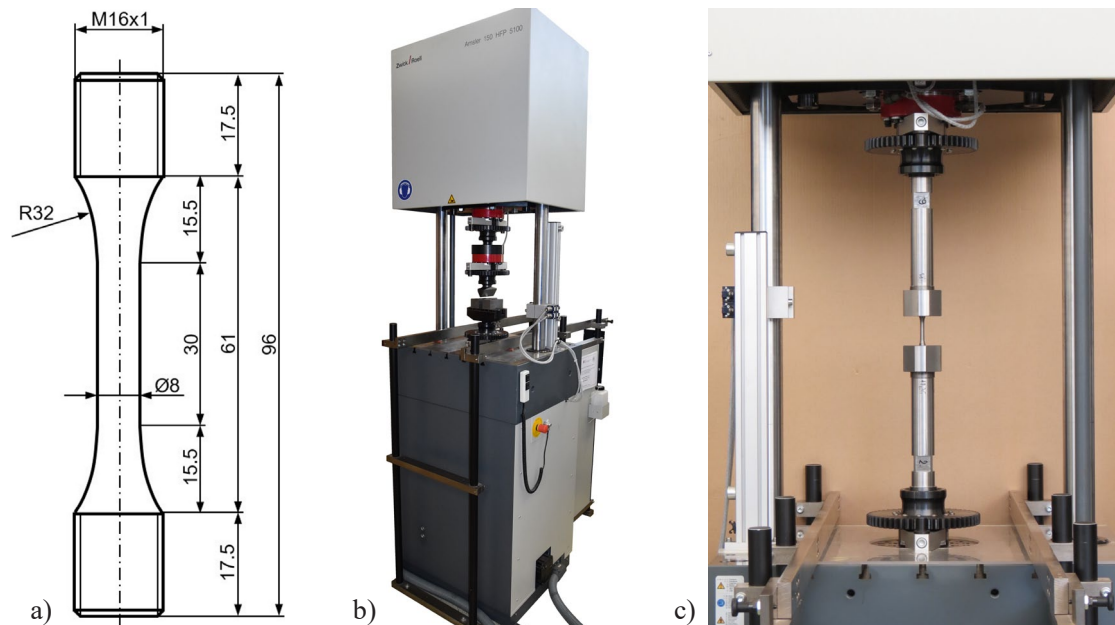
Test specimen and experimental machine used for fatigue tests; a) shape and dimensions of the test specimen; b) fatigue testing machine Zwick/Roell Amsler 150HFP 5100; c) detail of fatigue testing
